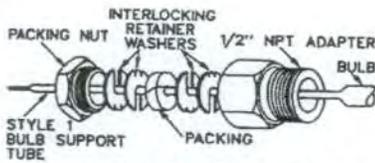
Part No. FTG13A-600R packing nut assembly. (Used with swaged bulb with support tube for direct immersion application.)
